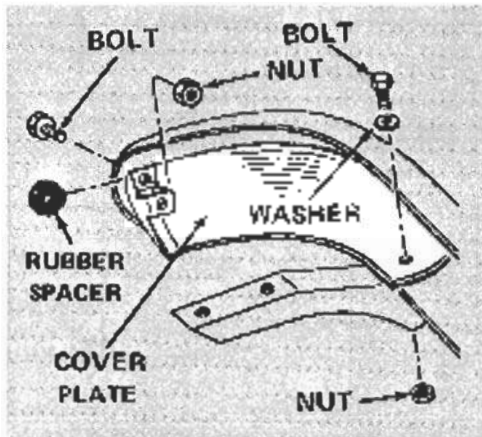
Cover plate being removed or installed on rear bumper.
